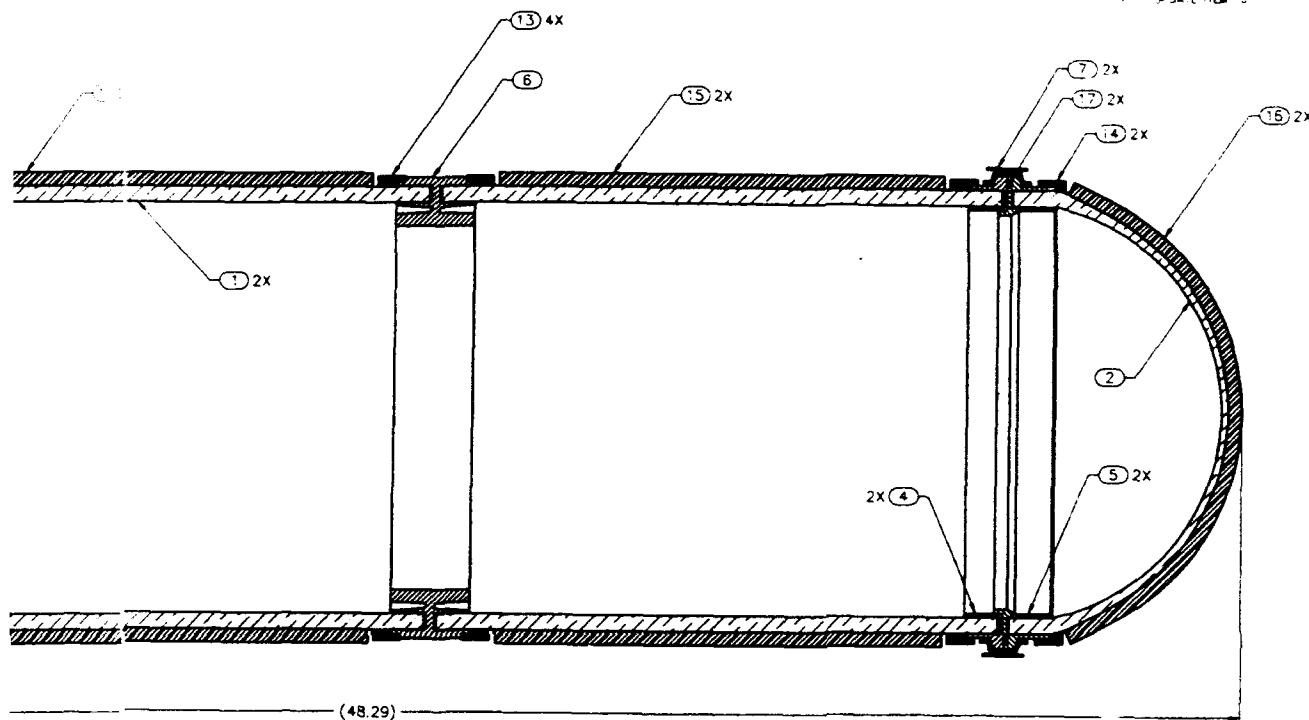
Components of the 12-inch OD scale-model ceramic external pressure housing assembly, Sheet 2.
